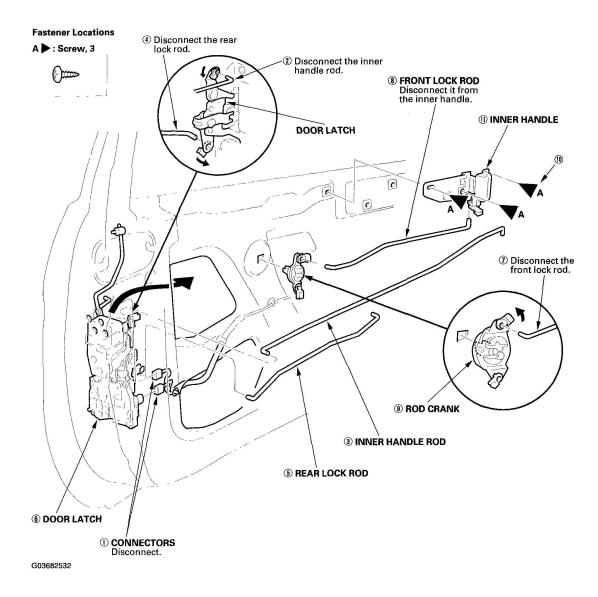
Identifying Removal Sequence Of Door Latch Courtesy of AMERICAN HONDA MOTOR CO., INC.
